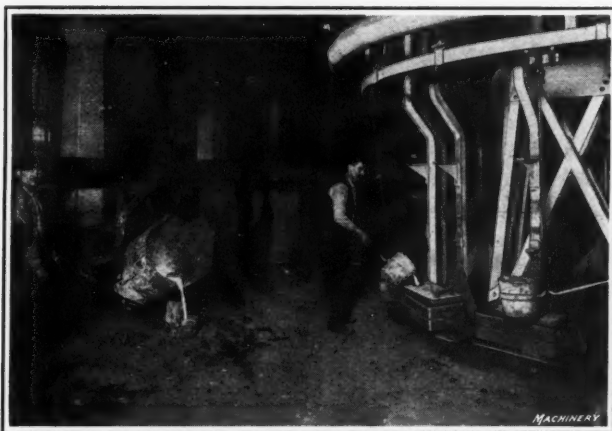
To facilitate pouring metal into molds in the Ford Motor Co.'s foundry, molds are brought in on a conveyor and transferred to a carousel on which each mold is supported by a pendulum. This swinging support eliminates vibration and prevents molds breaking. Molds are carried away by a second conveyor
